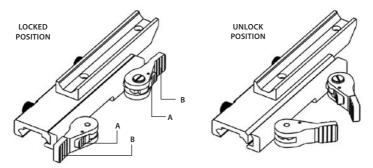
CO-LR MOUNT. TOP VIEW
